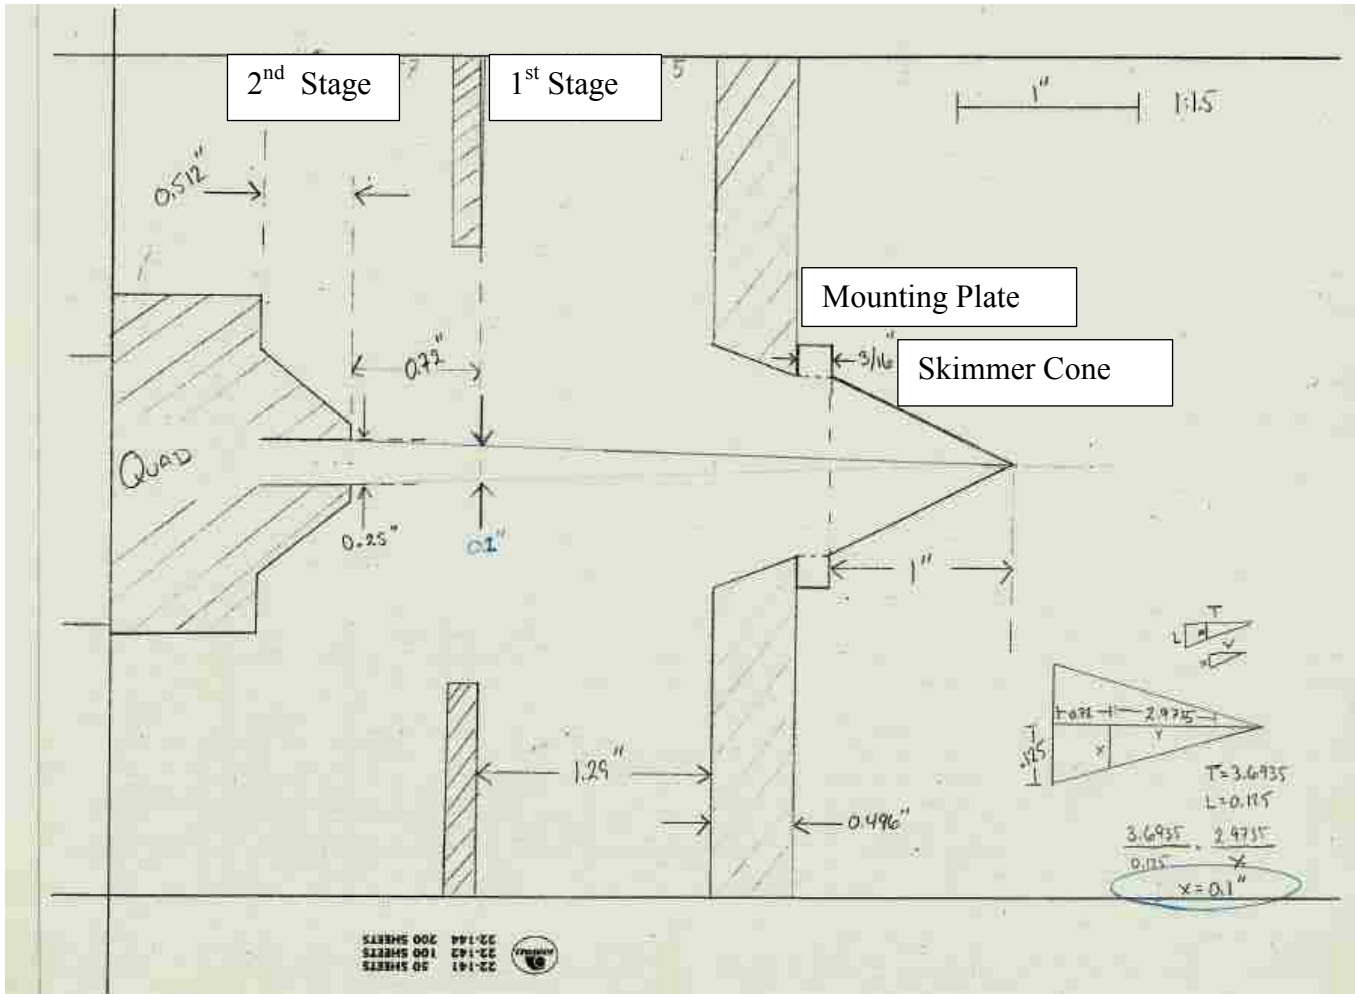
A skimmer cone with a 1mm opening gives entry into the 1st stage. skimmer currently installed has a 1.0 mm opening and is held in place by a metal collar; the vacuum seal is provided by a thin layer of TorrSeal between the skirt of the skimmer and the mounting plate. A second skimmer with an opening of 0.5 mm is available (but not yet mounted) if working pressures higher than 1 Torr are needed.
